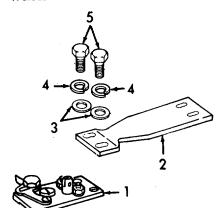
Clamp and Arm Assemblies, Assembly.
